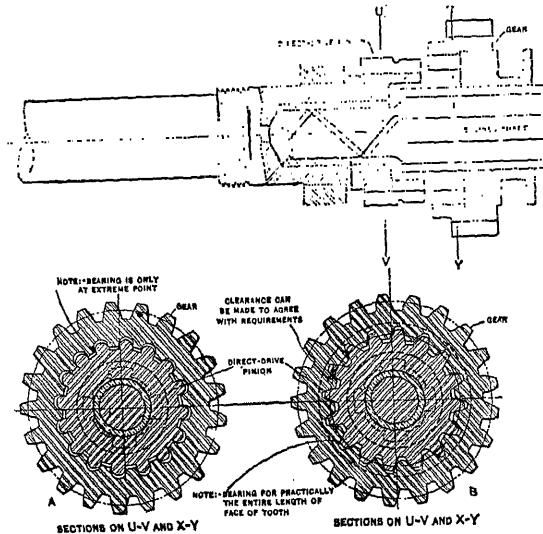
Internal gears used as a clutch. Fellows Gear Shaper Co.
